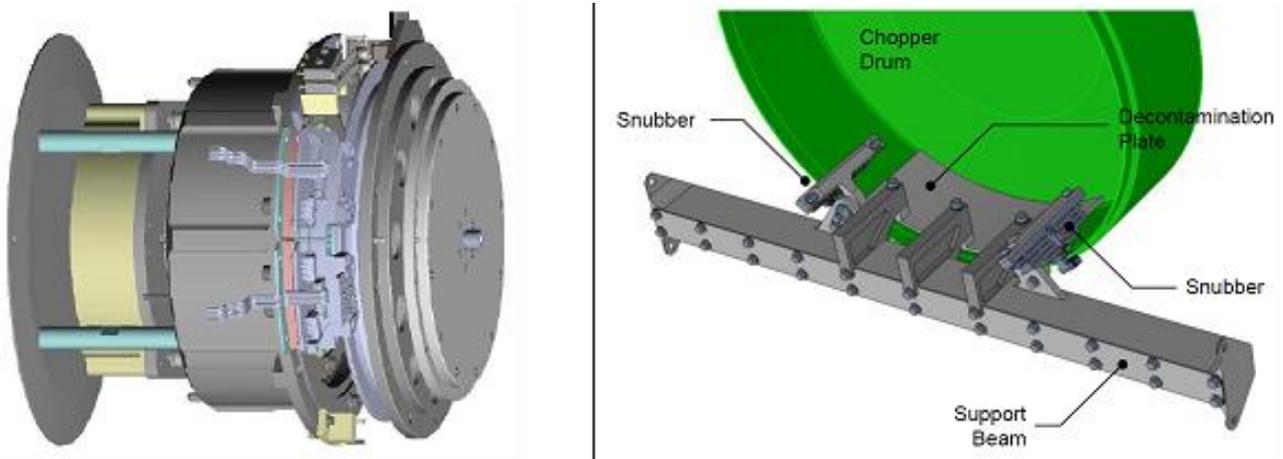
Sketch of the assembled mechanism assembly including the adapter disks for CDM and CTM (left) and snubber assembly for CDM (right)
